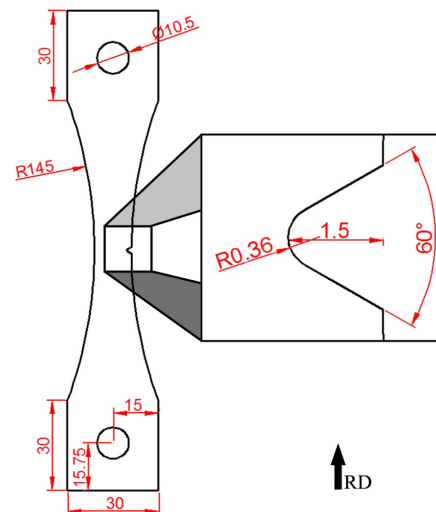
Geometry of fatigue test specimen and detail of V-notch (dimensions in mm).
